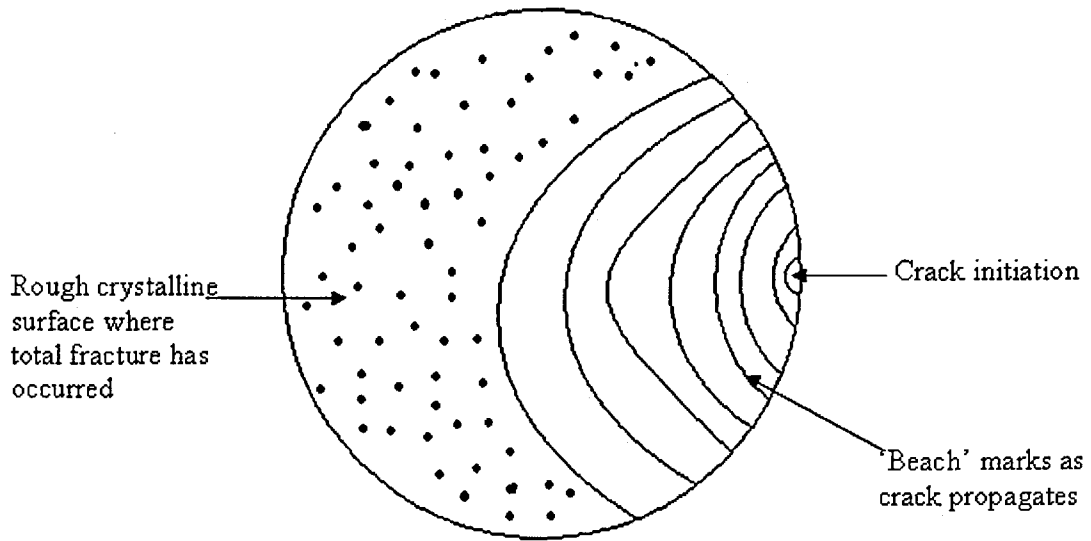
Schematic diagram of a typical fatigue fracture surface
